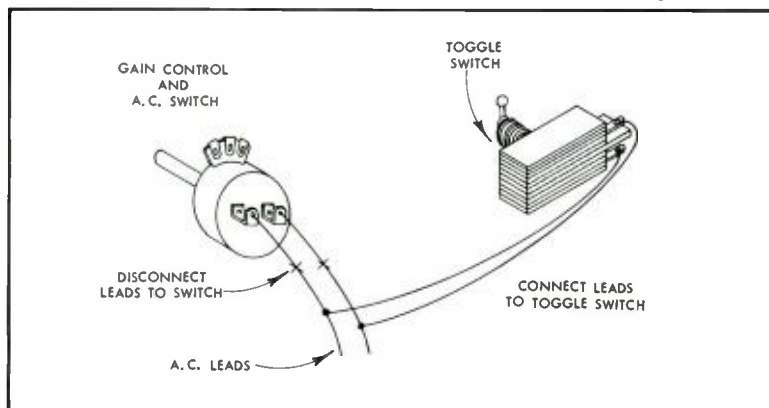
Installing a separate on-off switch to reduce hum pickup.
